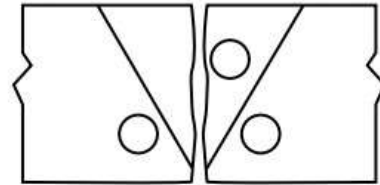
Failure of unreinforced (flushed) butt weld
